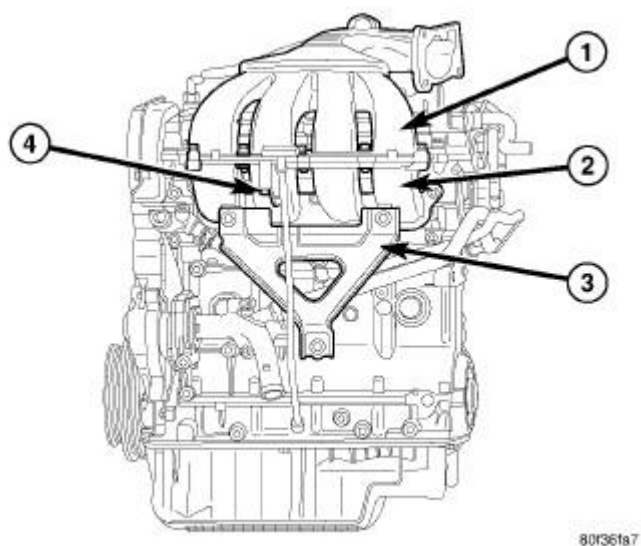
Lower Intake Manifold Support Bracket - 2.4L Turbo
